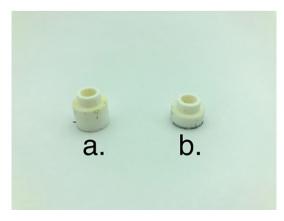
LineRollerSpacerTop (a) and LineRollerSpacerBottom (b) 3D printed parts.
